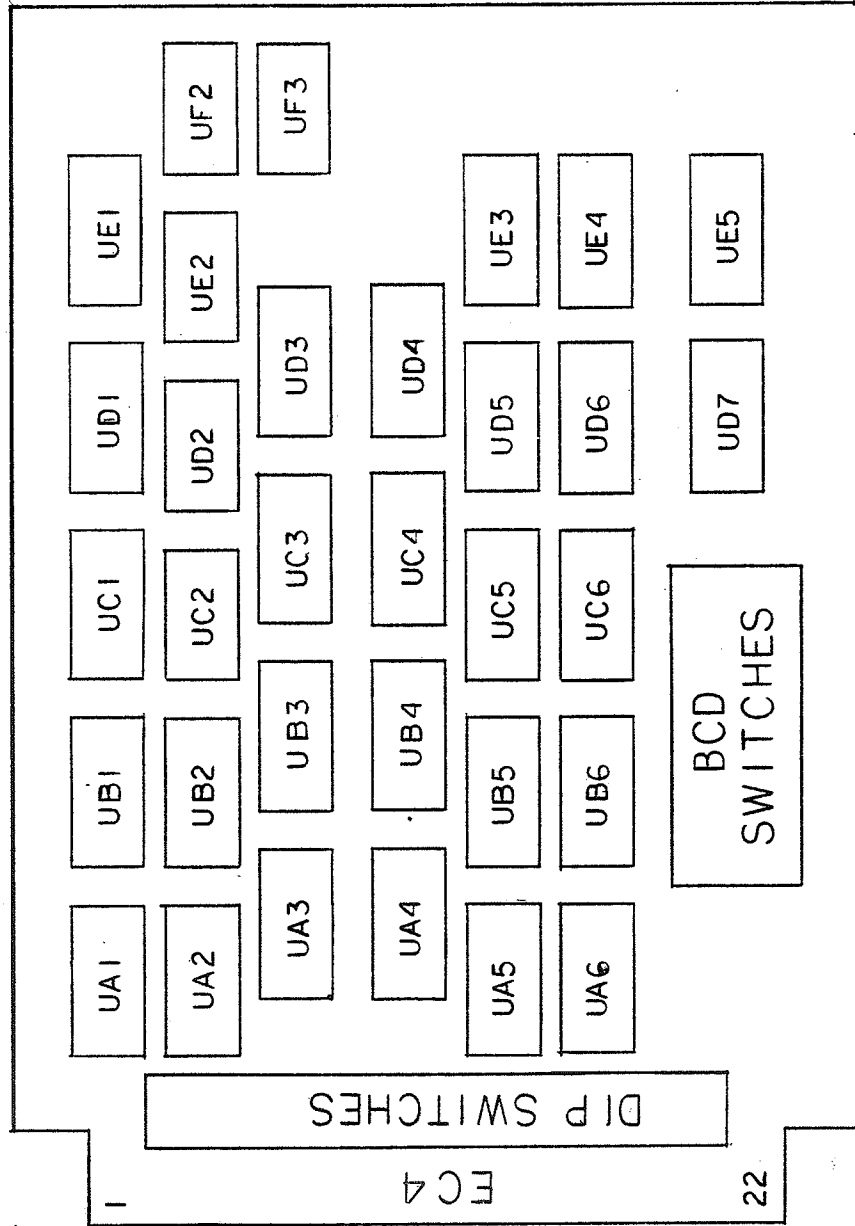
Component layout for the 280 DAS RF controller circuit board. (Refer to Table 11 for IC identification and Table 12 for EC4 pinout.)
